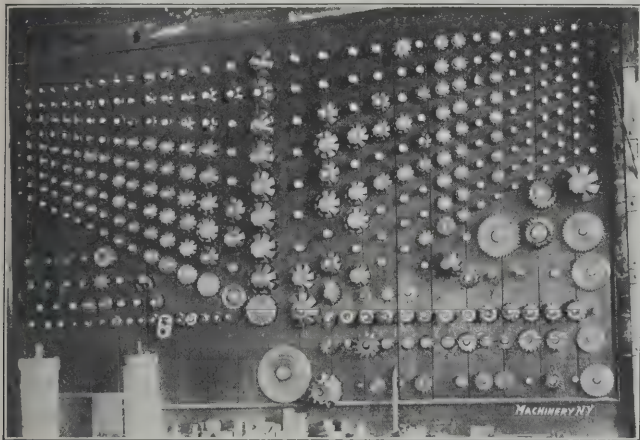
Gear and Milling Cutter Rack in the Tool-room
